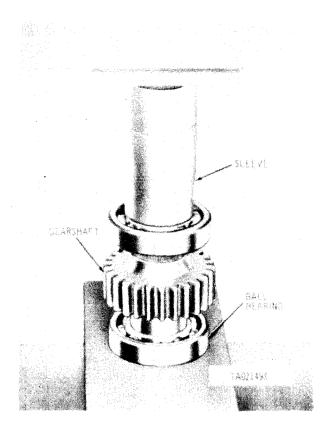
Pressing ball bearings on starter driven gearshaft.
